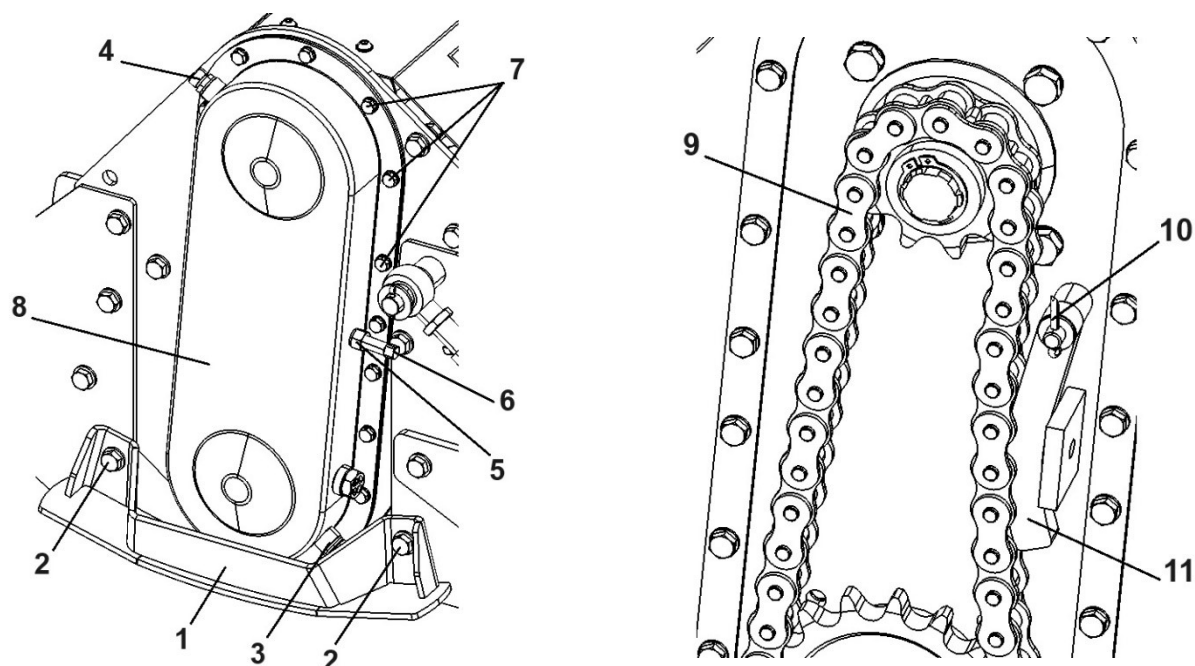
Replacing the chain or tensioner in the chain transmission: 1 – side skid, 2 – bolts with nuts, 3 - drain plug, 4 - filler plug, 5 – lock nut, 6 – chain tension adjusting screw, 7 - bolts securing the chain transmission guard, 8 – chain transmission guard, 9 – transmission chain, 10 – cotter pin securing the tensioner, 11 - tensioner
